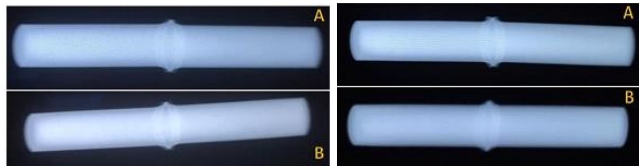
, 8.4. X-ray inspection of the third piece side A, side B, and fourth piece side A, side B.
